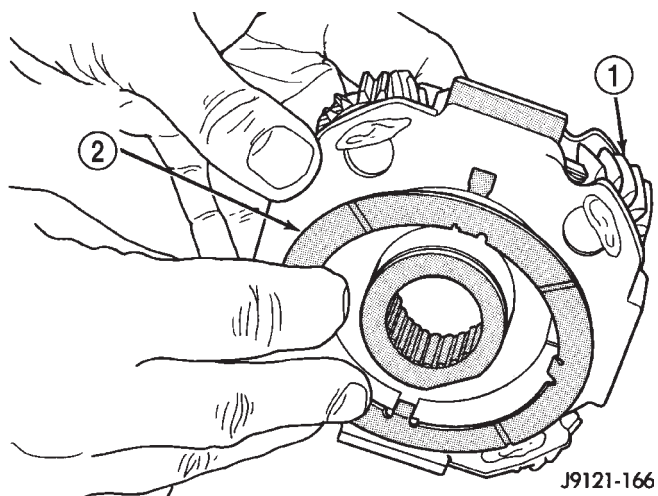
Installing Rear Thrust Washer On Front Planetary Gear
